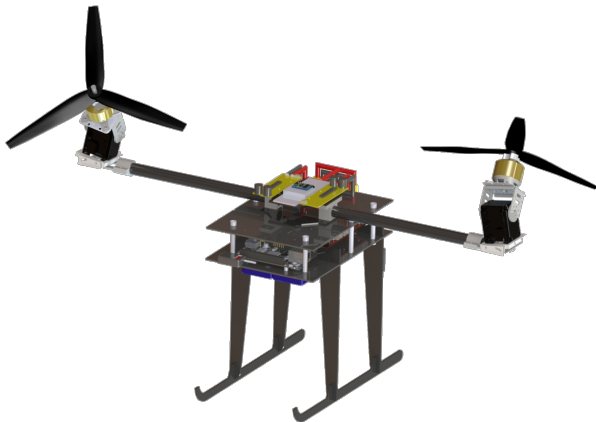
Project ProVANT tiltrotor first prototype CAD.
